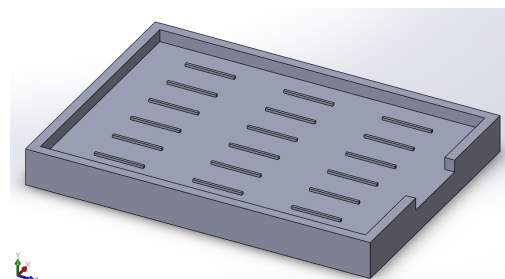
The used mould for producing microfluidic chips visualised in Solid-Works. 18 channels can be produced with this mould. The channel dimensions are $500\mu\text{m} \times 500\mu\text{m} \times 1\text{cm}$ [$w \times h \times l$]
